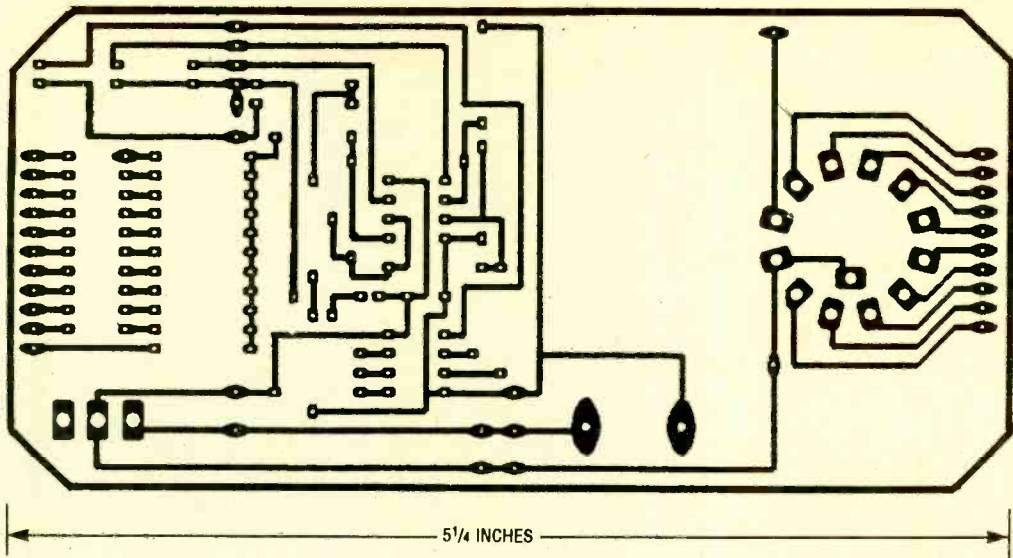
The Cable Tester was assembled on a printed-circuit board. Here is a full-size template for that board.
